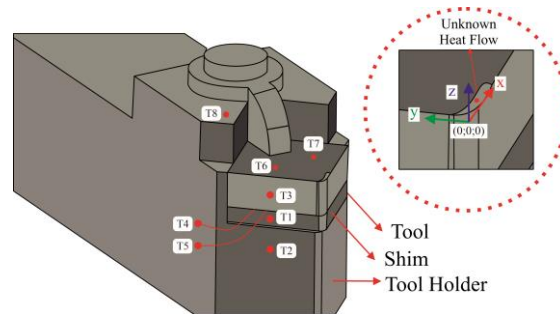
Positioning thermocouples T1 to T8 in the tool set, shim, and tool holder.
